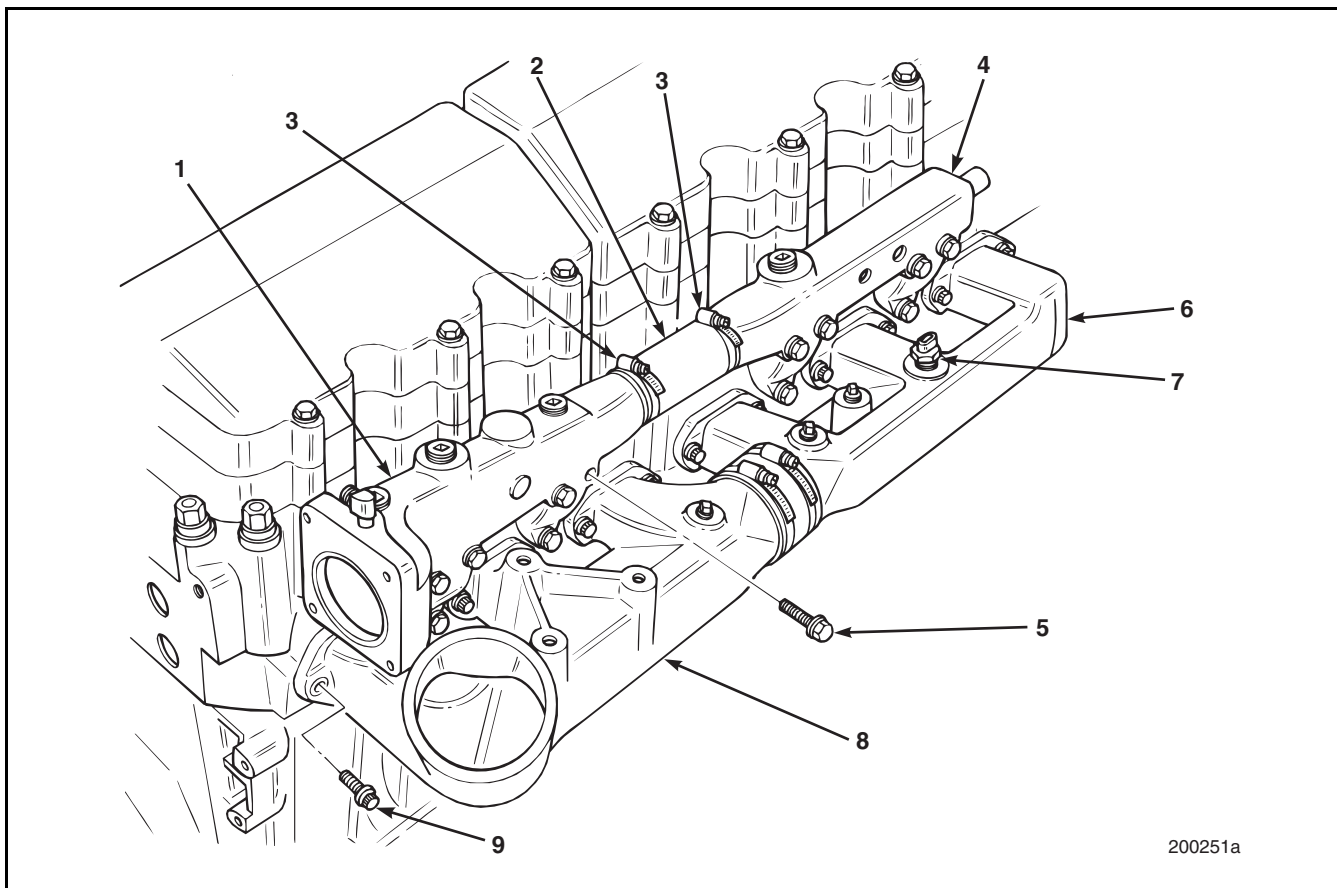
Coolant and Air Inlet Manifold Installation
